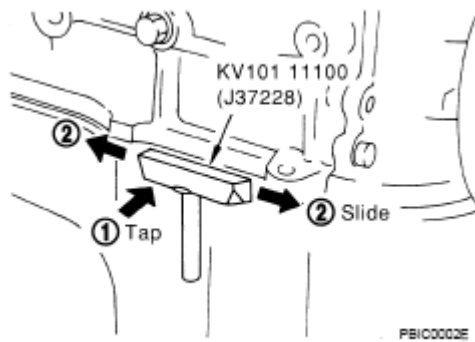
Inserting Tap Seal Cutter And Slide By Tapping On Side
